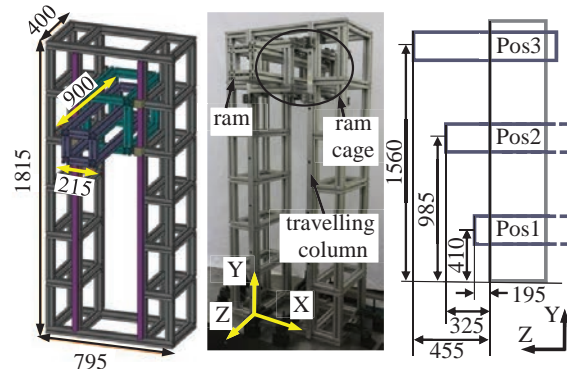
Laboratory prototype of a lightweight machine tool. (left: CAD-model (dimensions in mm); middle: real prototype; right: investigated poses)
